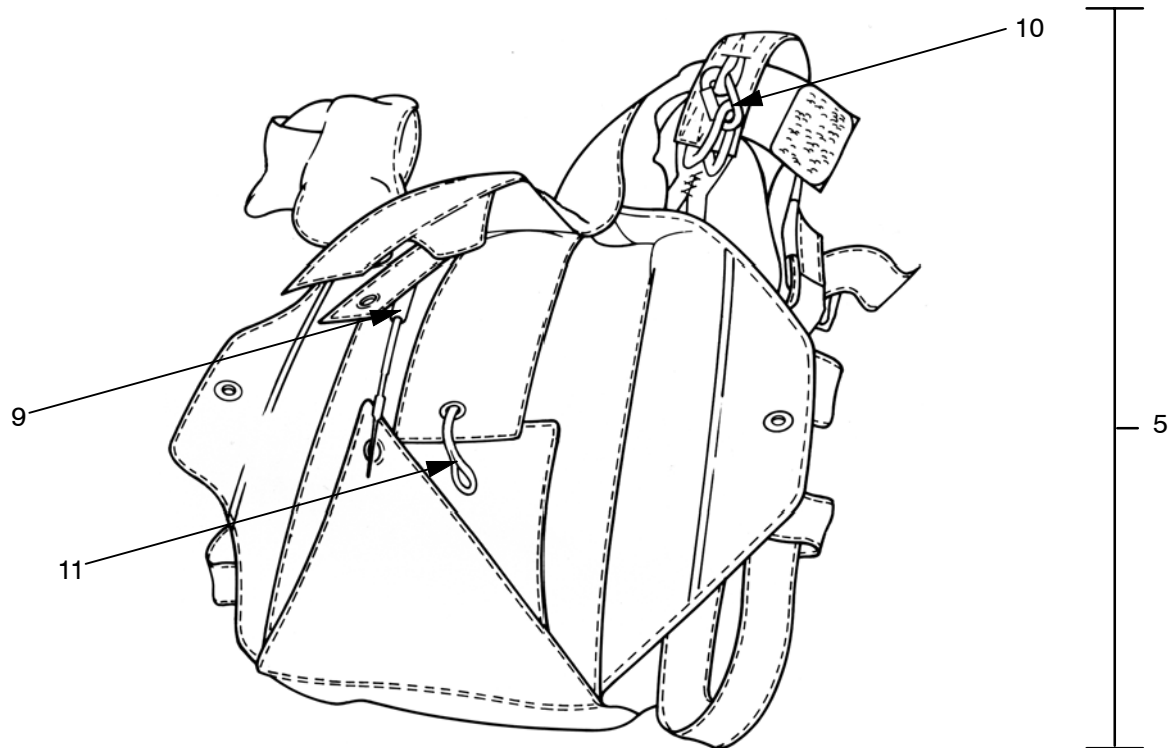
A/P22P-21 Crew Backpack Assembly (Sheet 3 of 4)
